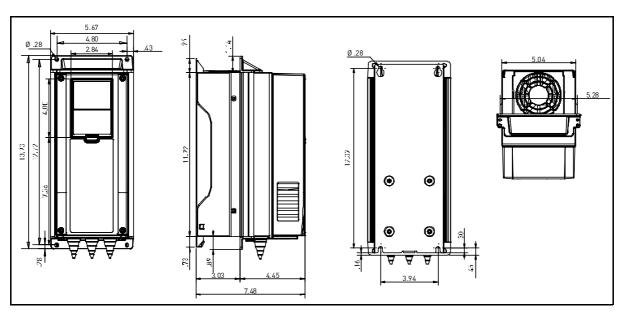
SmartVFD HVAC dimensions, MR4, flush mount
